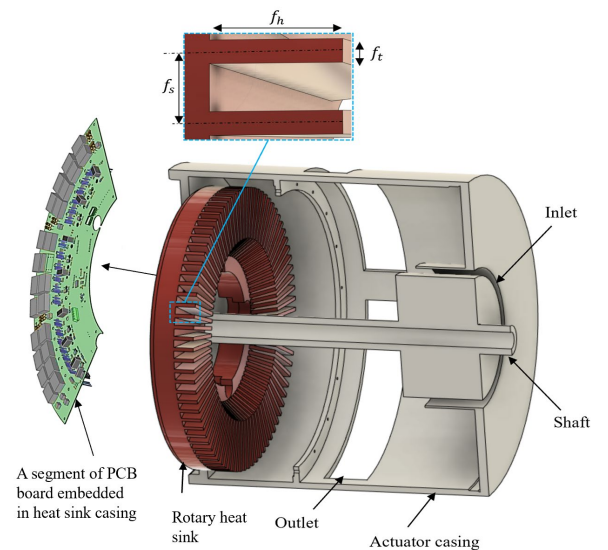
Physical model of the rotary actuator (sectional view of the actuator casing).
